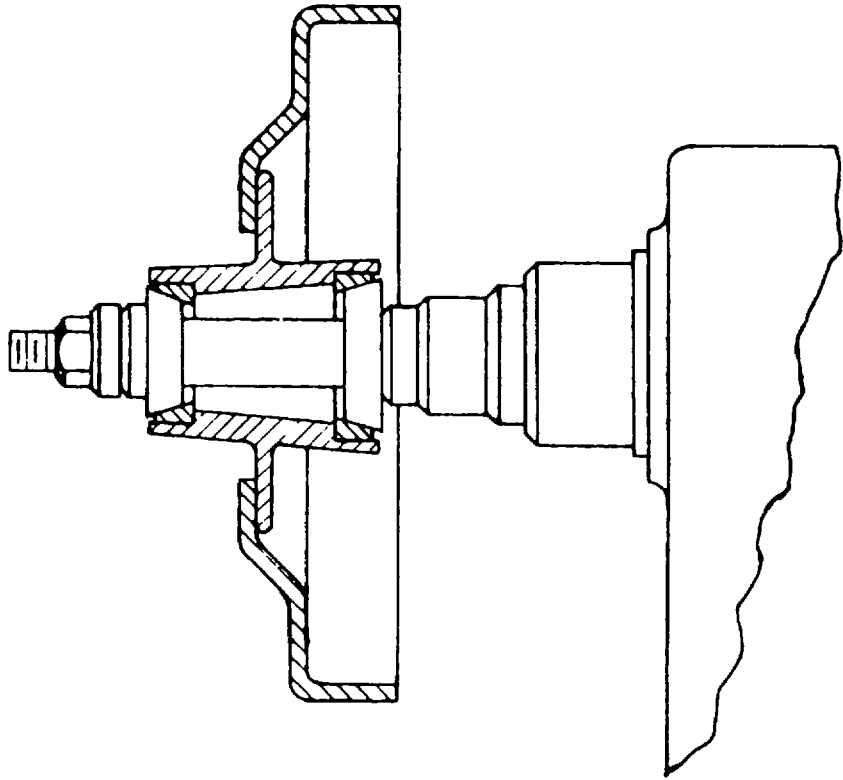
TAPERED BEARING HUB (TRUCK)
